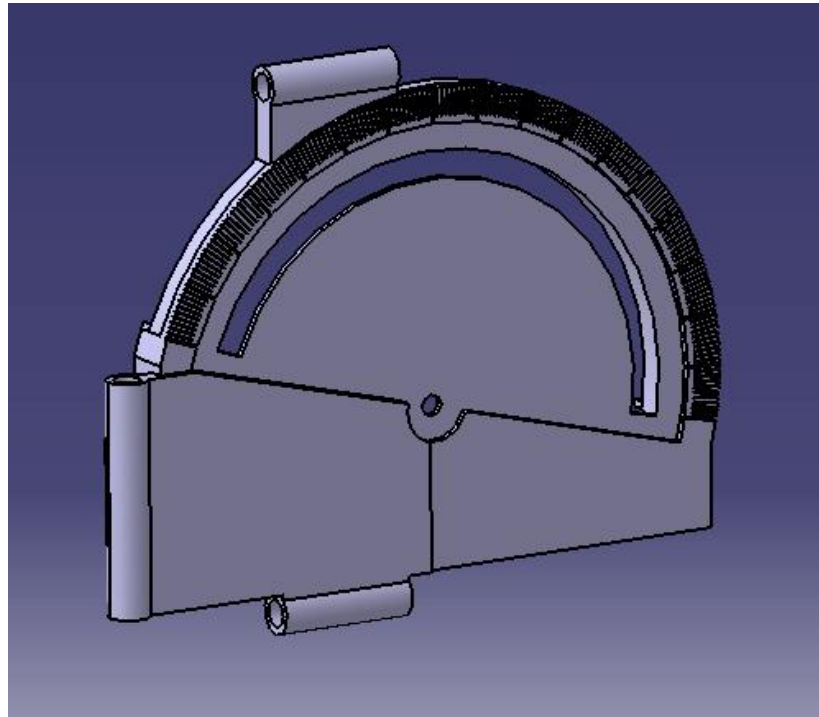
Three dimensional model of the main frame of the Angle Measurement Unit consisting of markings for angles.
